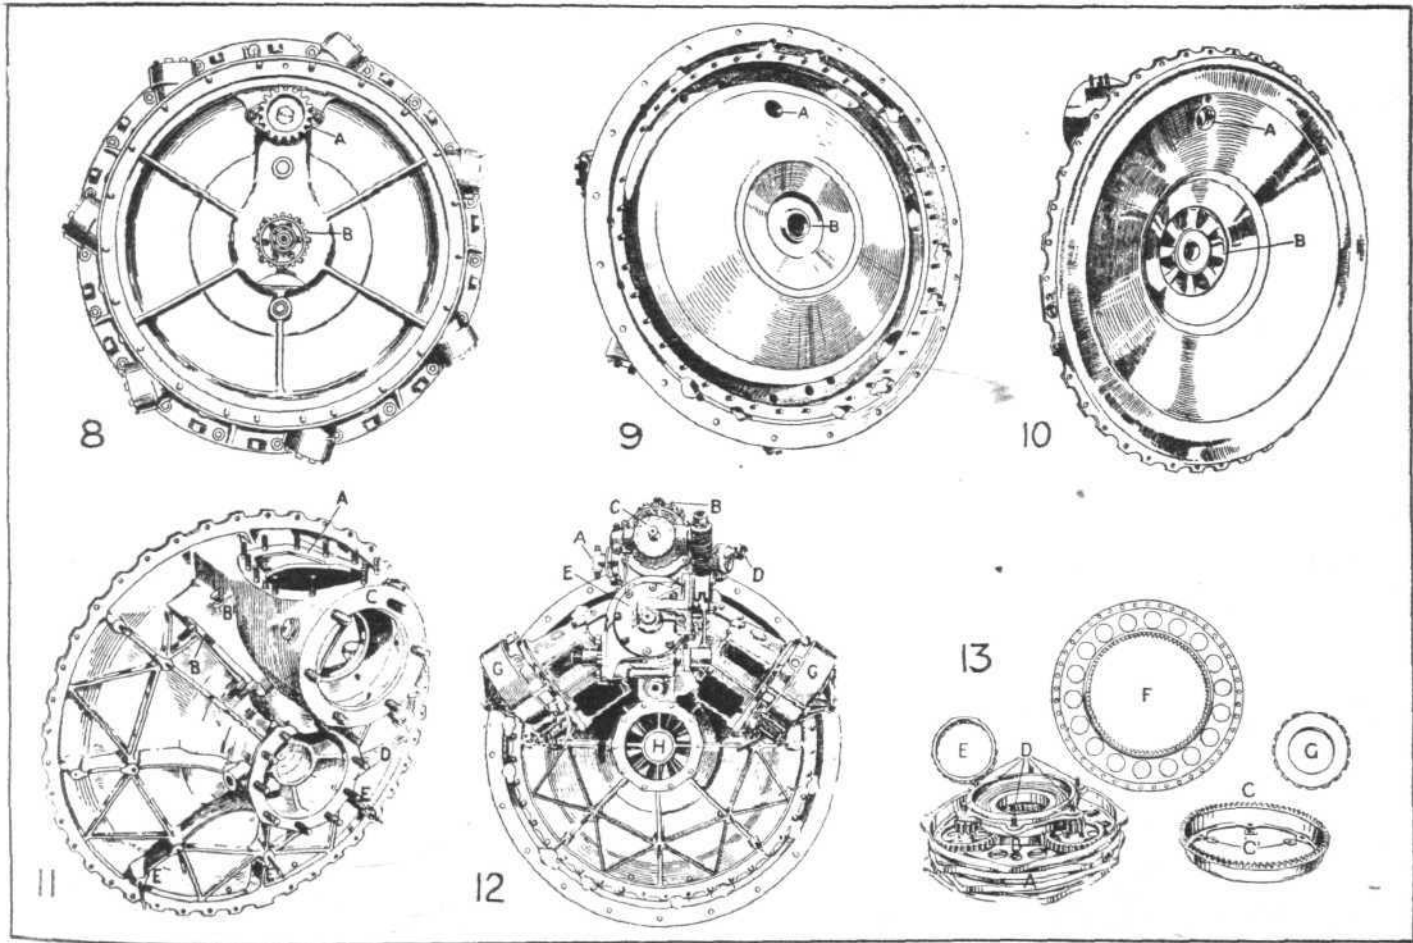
shows the front face of the induction case of the geared fan type engine, with (a) the auxiliary and starter drive, and (b) the fan gear. The rear of the induction case (geared fan type) is shown in Fig. 9. (a) is the hole for the auxiliary drive, and (b) the hole for the fan shaft. The front of the supercharger cover is shown in Fig. 10, where (a) is the hole for the auxiliary drive shaft, and (b) the fixed guide fan. Fig. 11, induction casing rear cover showing (a) auxiliary drive face, (b) and (b1) magneto drive face and set screw, (c) hand or inertia starter face, (d) induction face, and (e) wire carrier clip studs. The arrangement of the accessories on the supercharger rear cover is shown in Fig. 12, where (a) is the oil pump (b) the gas distributor, (c) the spare drive shaft, (d) the tachometer drive, (e) hand or inertia starter, (g) magneto, and (h) fixed guide vane. Fig. 13, (a) cam drum, (b) cam gear carrier, (c) oil pump driving bevel with (c1) its adjusting washers fitted on studs (d), (e) the roller race for (b), (f) the timing plate, and (g) the cam gear locknut.
